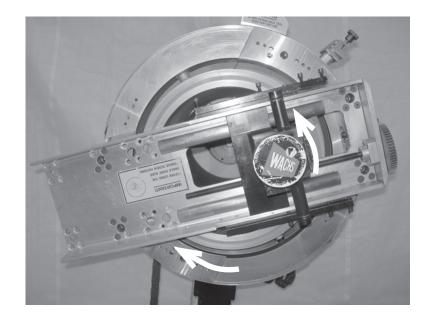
Turn the feed knob counter-clockwise as the machine rotates to advance the tool into the pipe.
